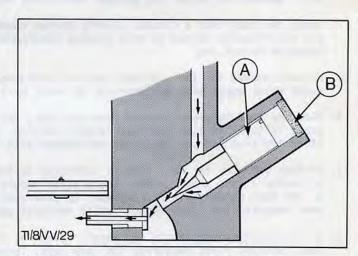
Fuel mixture or CO adjustment. A - Mixture screw B - Tamperproof plug
